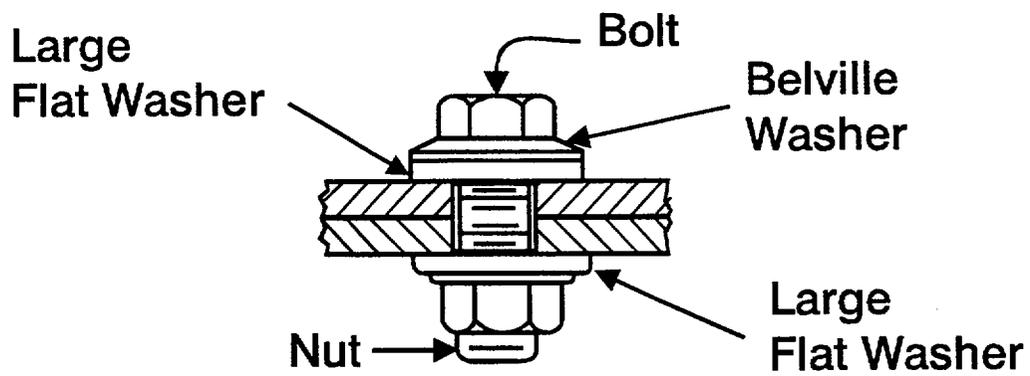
Bolted Electrical Joint with Belleville Washer.
